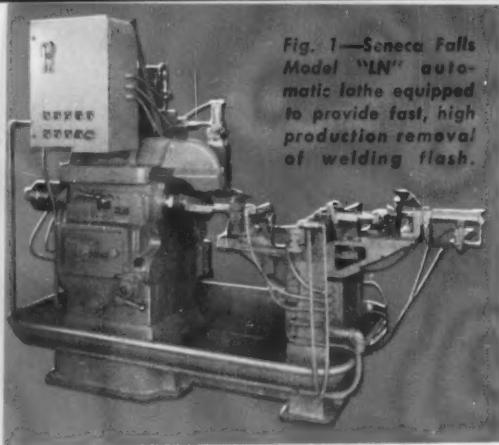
Seneca Falls Model "LN" automatic lathe equipped to provide fast, high production removal of welding flash.
